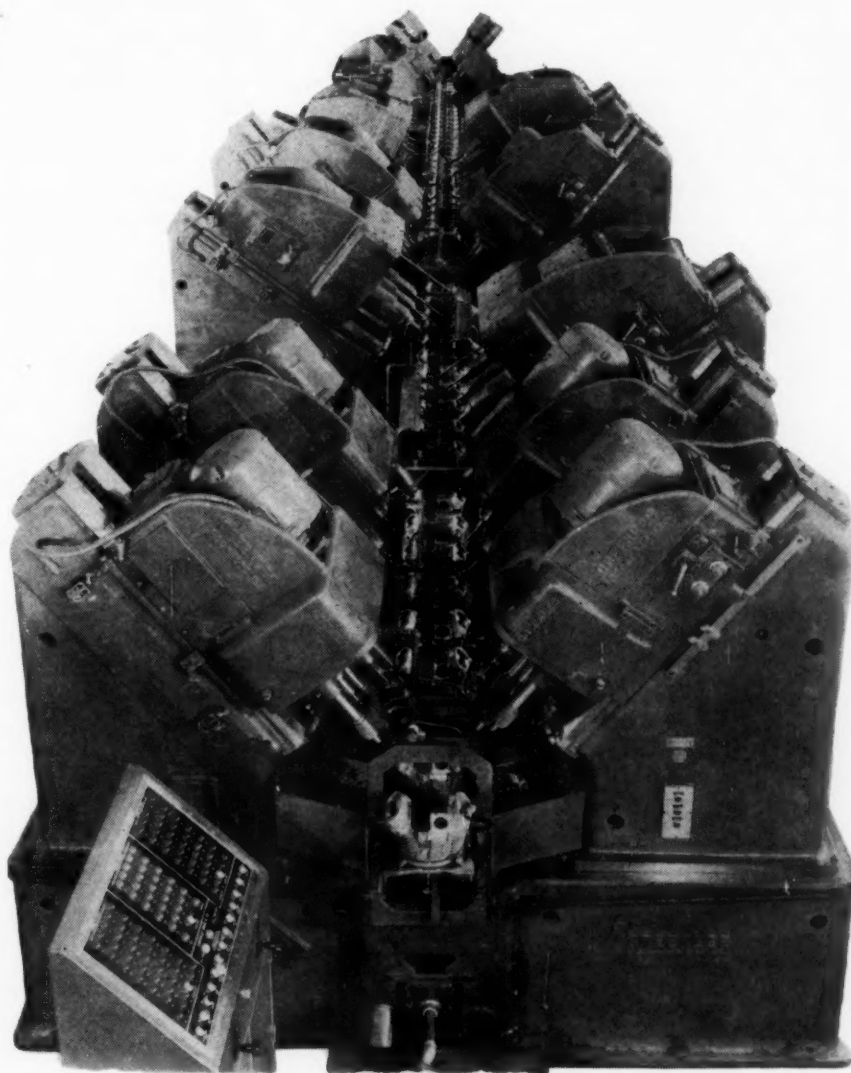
LOADING END OF 56-STATION SECTION OF THE GREENLEE TRANSFER MACHINE SHOWING MASTER CONTROL BOARD
